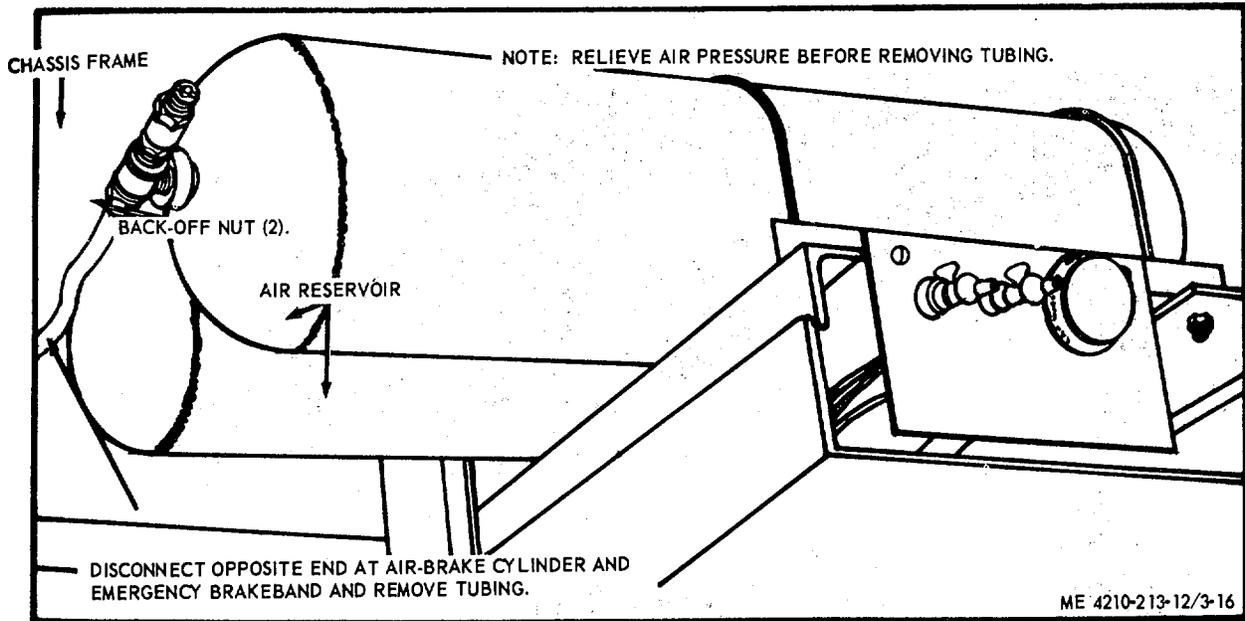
Air Tank tubing and fittings, removal and installation.
